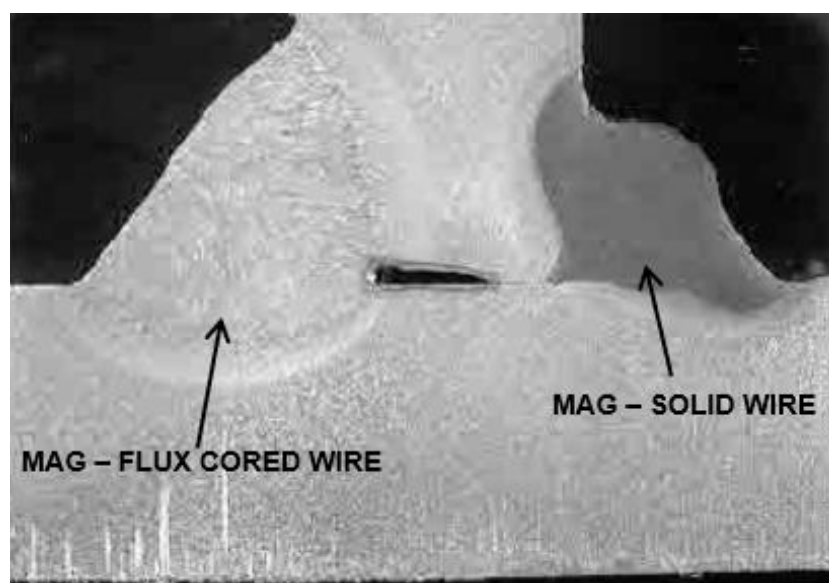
A comparison of the penetration depth and the shape of a weld metal of GMA (DC+), welded the low-alloy steel T-joint, in horizontal position, using rutile flux cored wire 1,2 mm dia. OK Tubrod 15.13 (240 A / 25 V, $V_s = 28$ cm/min) and solid wire 1,0 mm dia. (190 A / 17 V, $V_s = 18$ cm/min). CO₂ shielding gas flow rate 14-16 l/min [1, 13]
